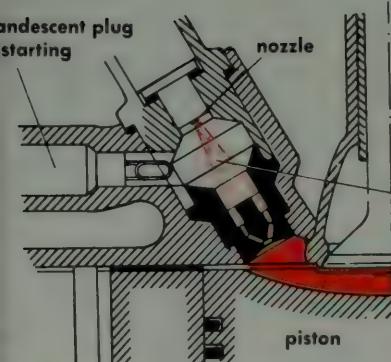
PRECOMBUSTION CHAMBER OF A DIESEL ENGINE
